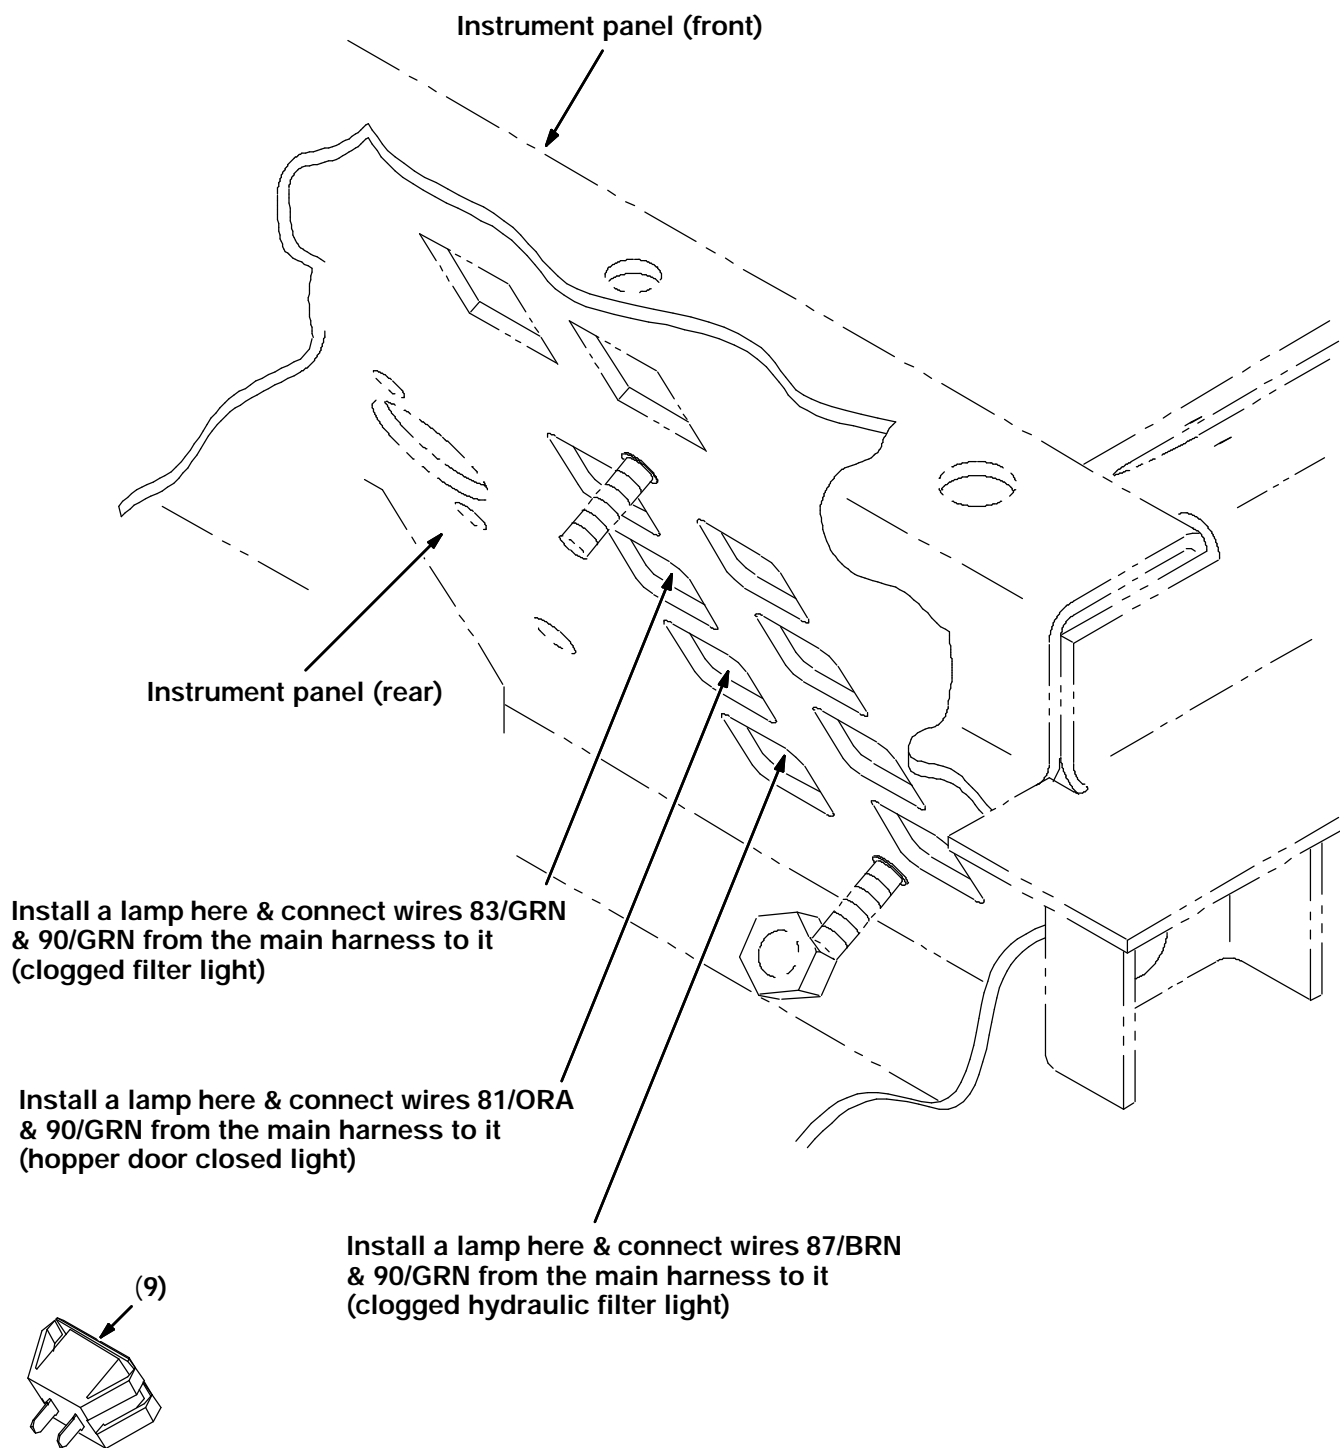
Installation of Indicator Lamps Behind Instrument Panel
